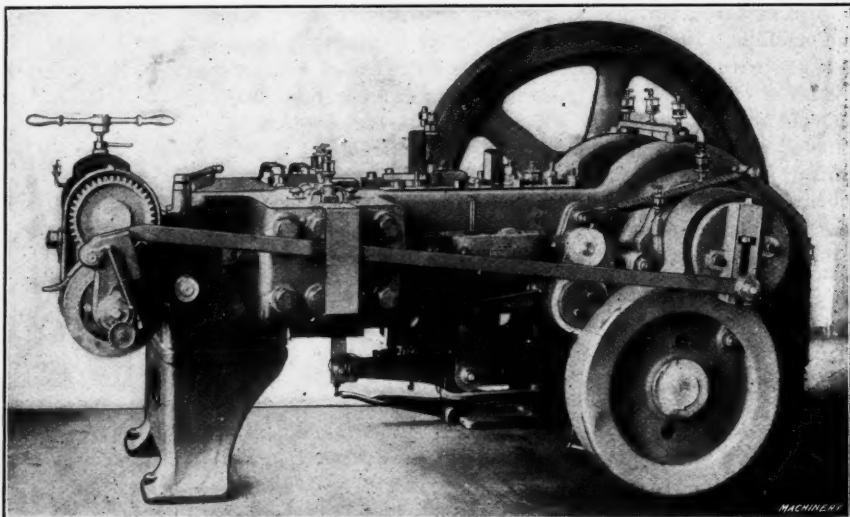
Double-stroke Open-die Cold-header—E. J. Manville Make
